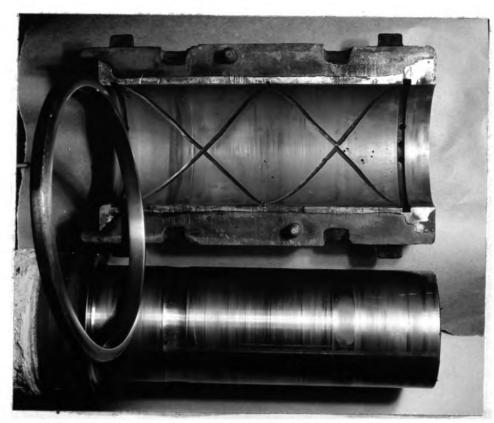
Damaged Journal and Bearing Due to Oil Ring.
